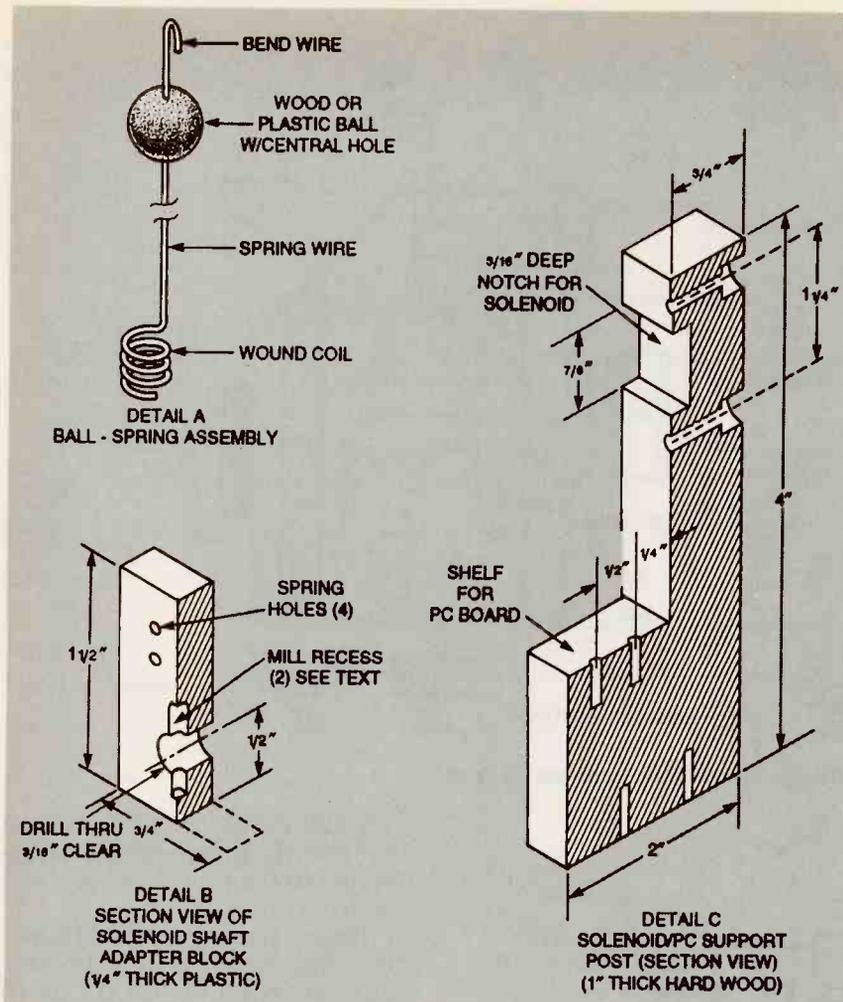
DETAILS OF MECHANICAL PARTS: ball-spring assembly (Detail A); solenoid shaft adapter block (Detail B); solenoid/PCB support post (Detail C).
